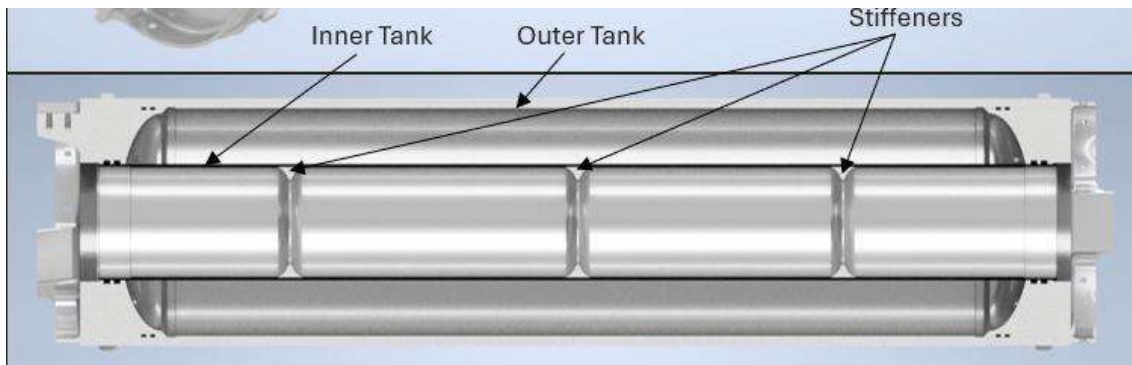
3rd-Angle and Half-section view of the full tank assembly
